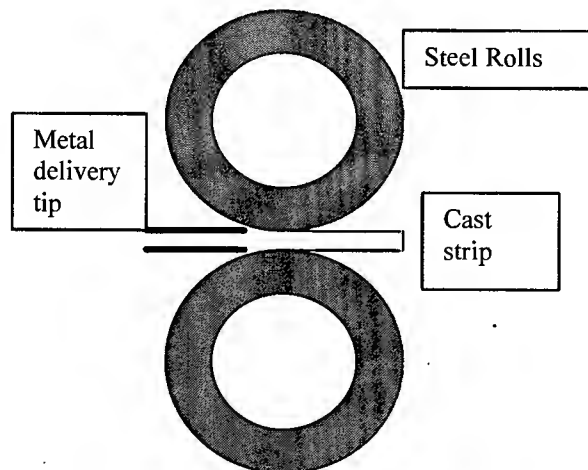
Schematic of a horizontal type twin-roll thin strip aluminum caster.
